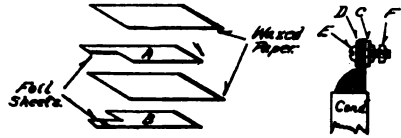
METHOD OF ASSEMBLING THE CONDENSER
